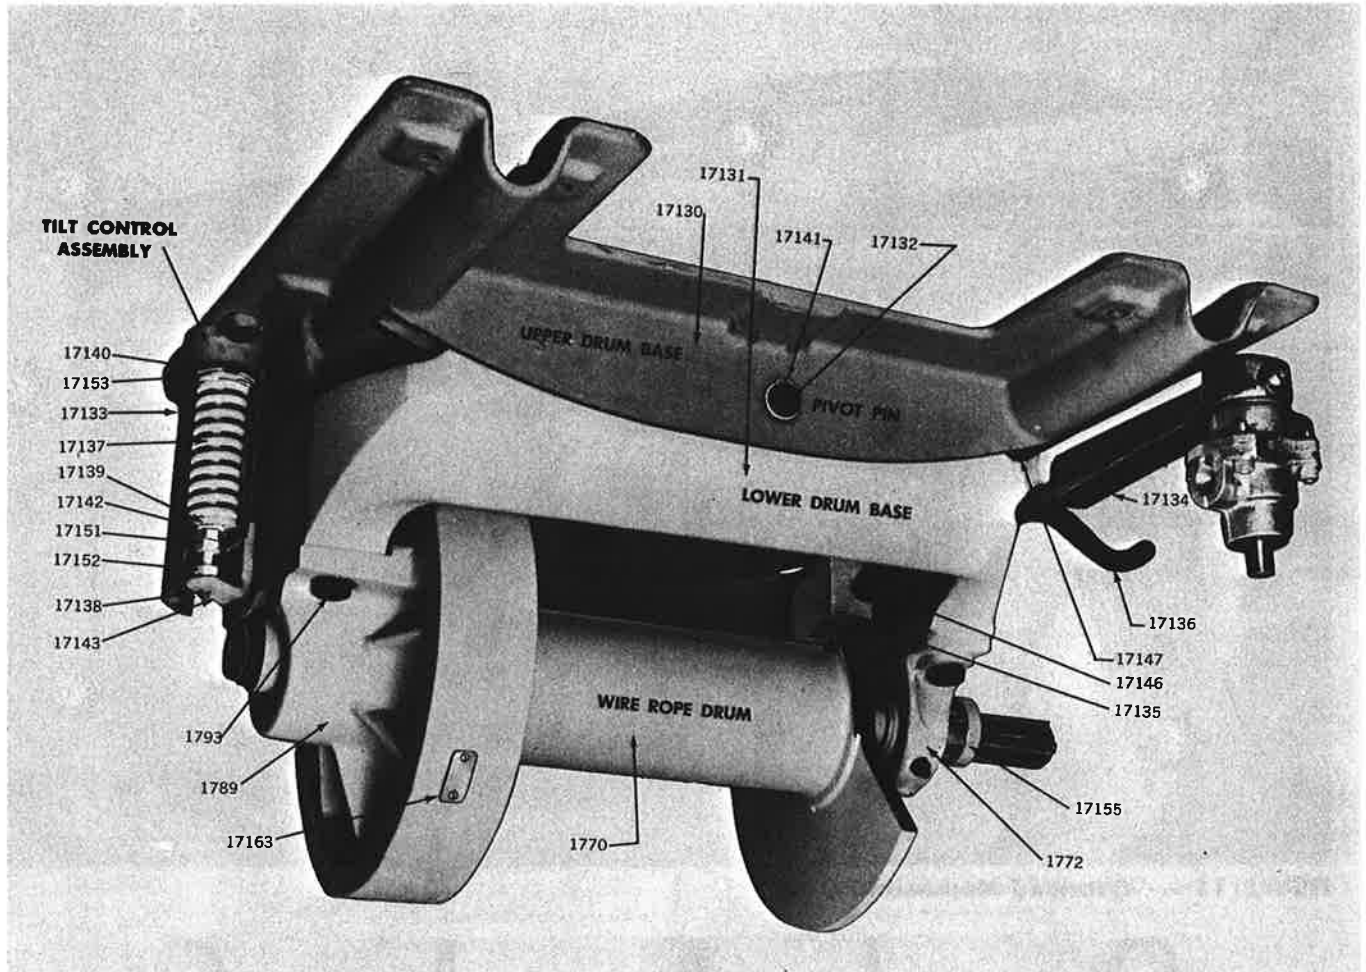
Level Wind Drum and Drum Base Assembly
